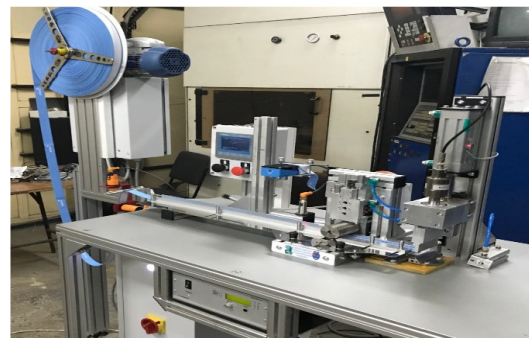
Specialized hybrid equipment for electric pressure and ultrasonic welding
